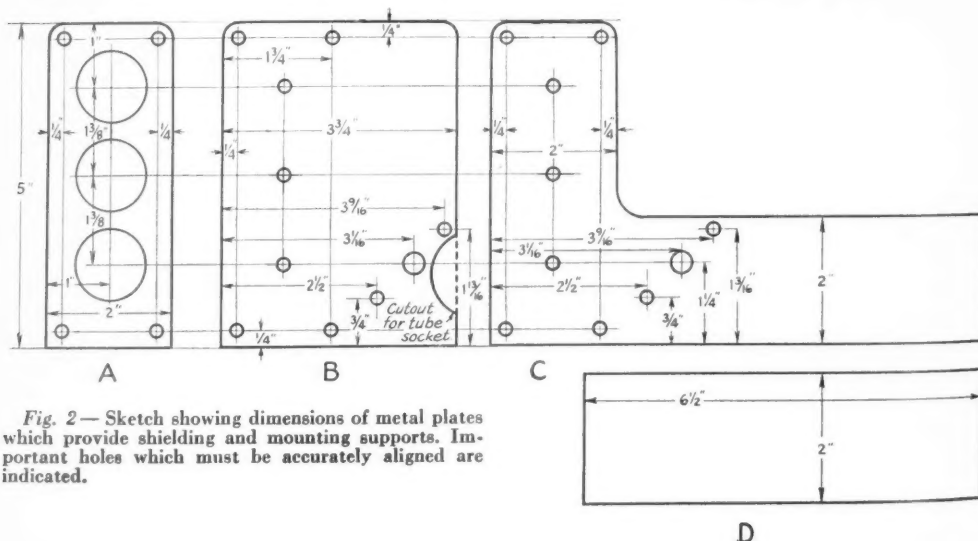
Sketch showing dimensions of metal plates which provide shielding and mounting supports. Important holes which must be accurately aligned are indicated.
